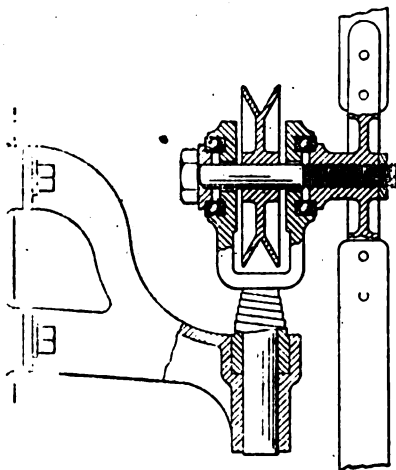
Section through Fan and Pulley Spindle, and Support.
